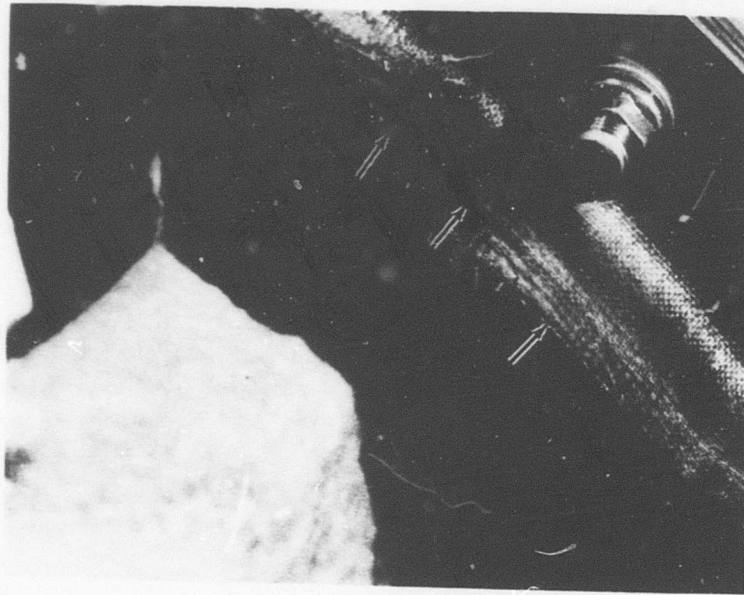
Crack Near Bottom Flange of Composite Housing After Failure.
